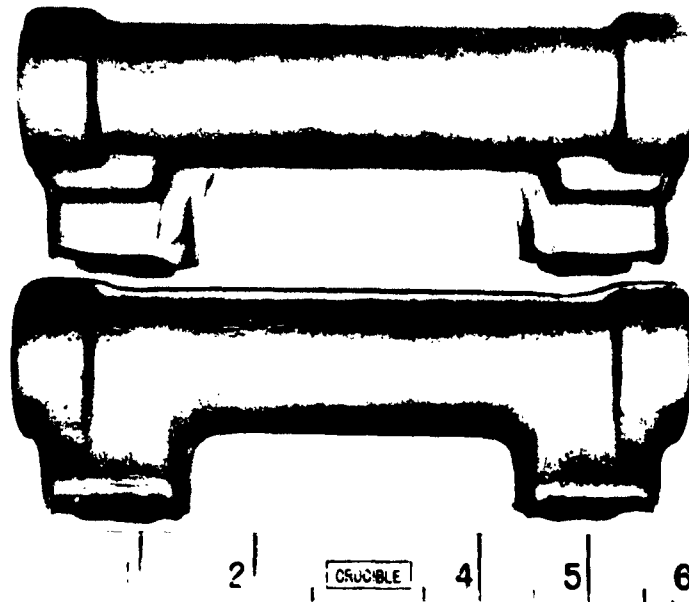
Closed Die Forgings 713-3 and 713-4 After Removal of Flash
